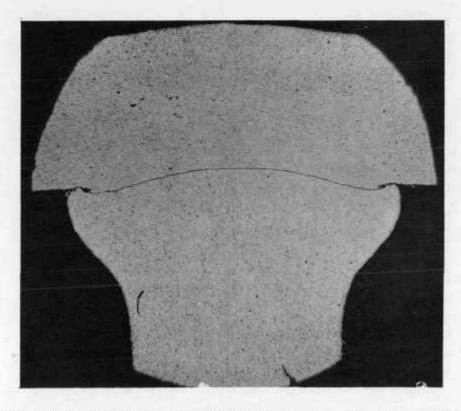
Resistance Welded Element before Corrosion
